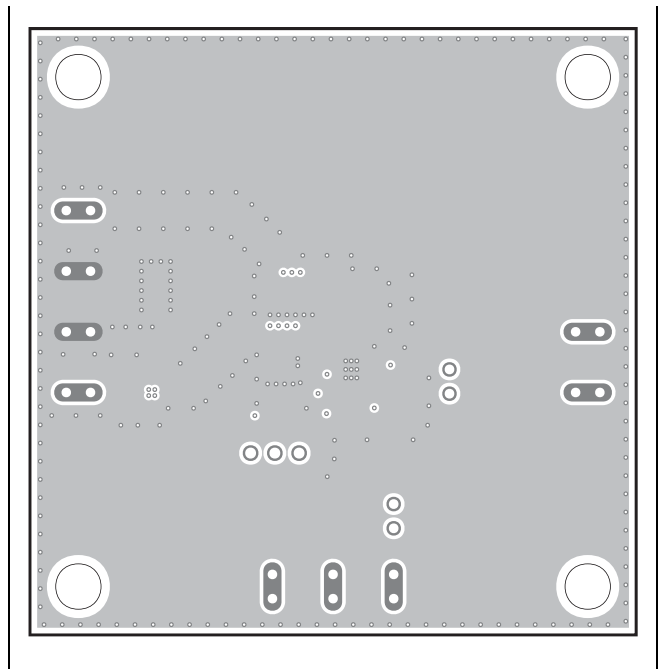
MAX17760AAEVKIT# PCB Layout—Layer 2
